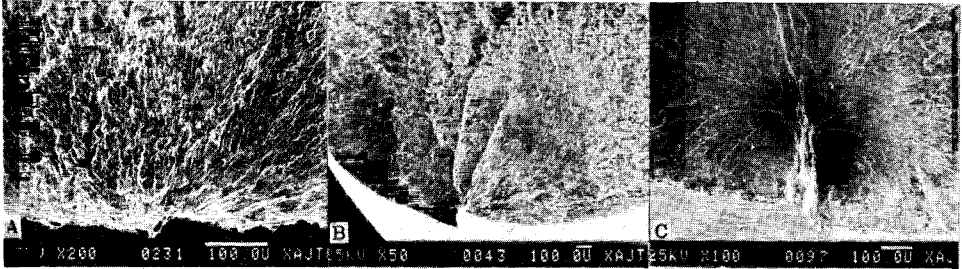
Fracture surfaces of Group A, B. and C.
